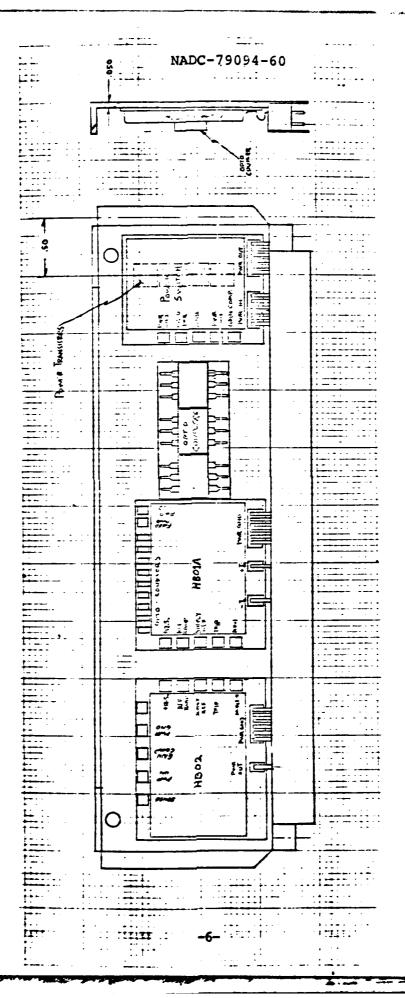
MOUNTING TECHNOLOGY ON OFF-SET FRAME.
